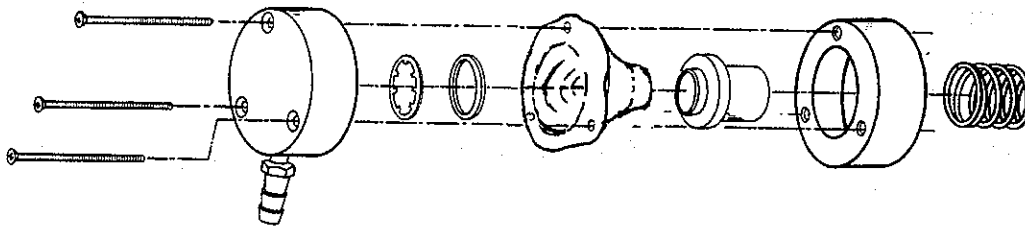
OXYGEN INPUT VALVE ASSEMBLY
